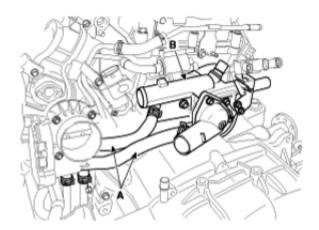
Identifying Oil Cooler Hoses And Water Temperature Control Assembly Courtesy of HYUNDAI MOTOR CO.
